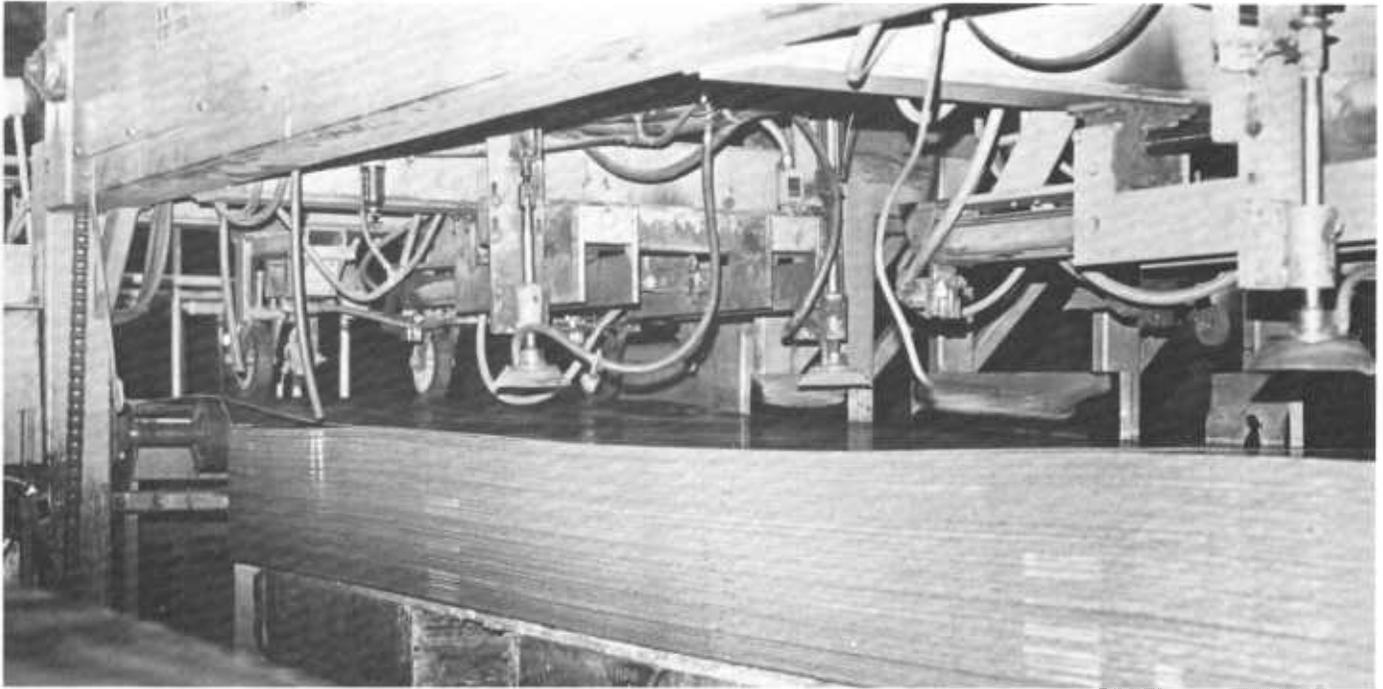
Vacuum feed loading of hardboard into first pass of double trimmer.
